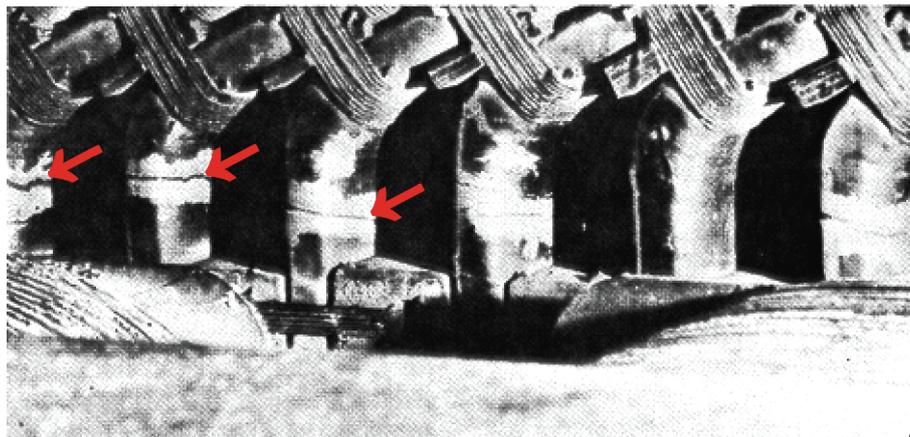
Example of stator coil insulation surface crack caused by repetitive mechanical stress
